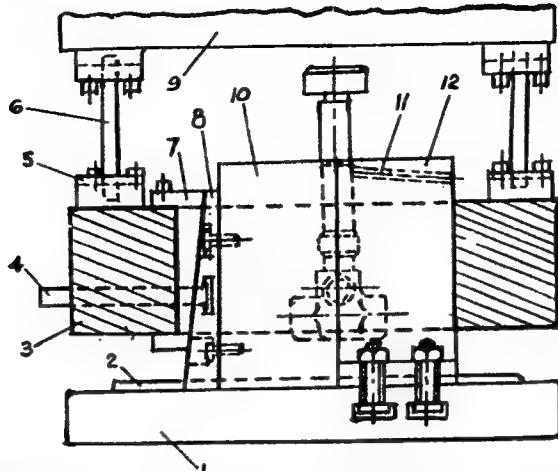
Diagram of a standard die for compression molding of molten metal used with a conventional hydraulic press for the manufacture of a multiple valve housing.
